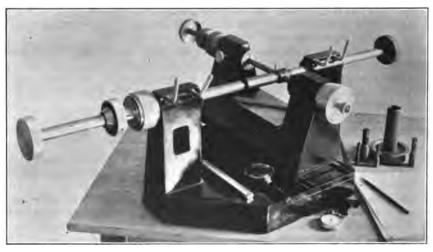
Apparatus for testing pitch diameter of screw thread gauges.
